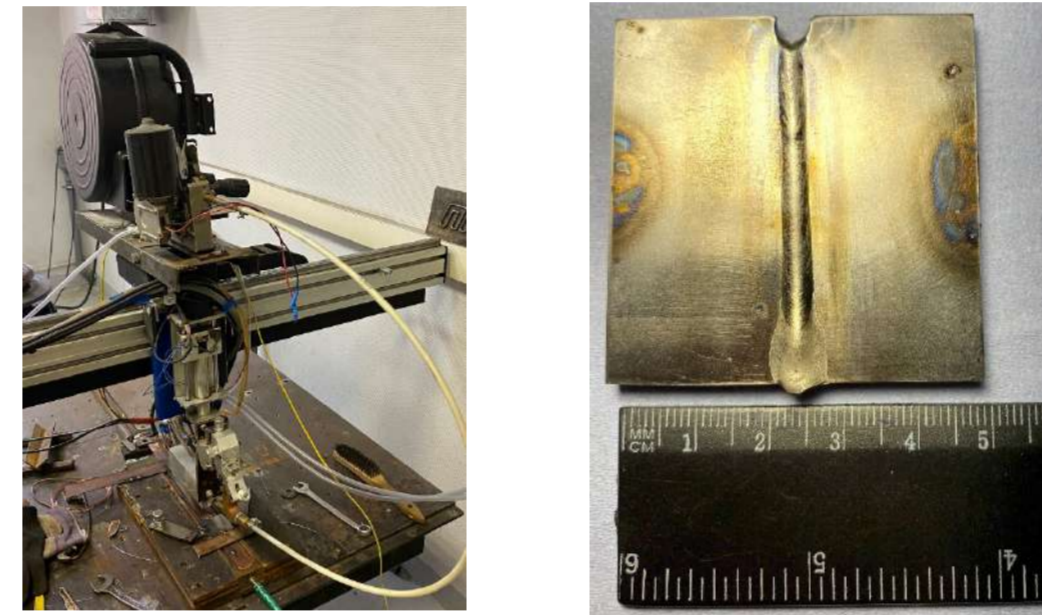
Plasma welding equipment and the appearance of the welded joint.
